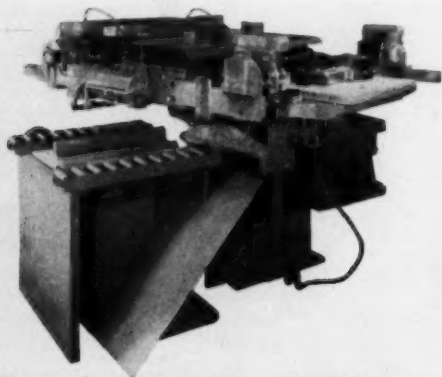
This machine indexes horizontally between jolt and draw. Mold has already been inverted and is swinging forward to draw table.
